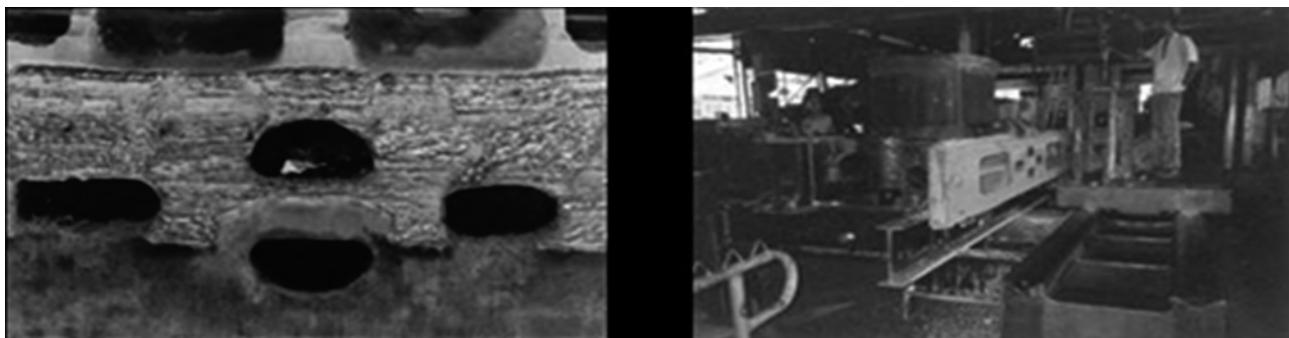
Views of cane milling machinery (virgin and bench) using traditional method of recuperation: electrode welding and machine tool.
